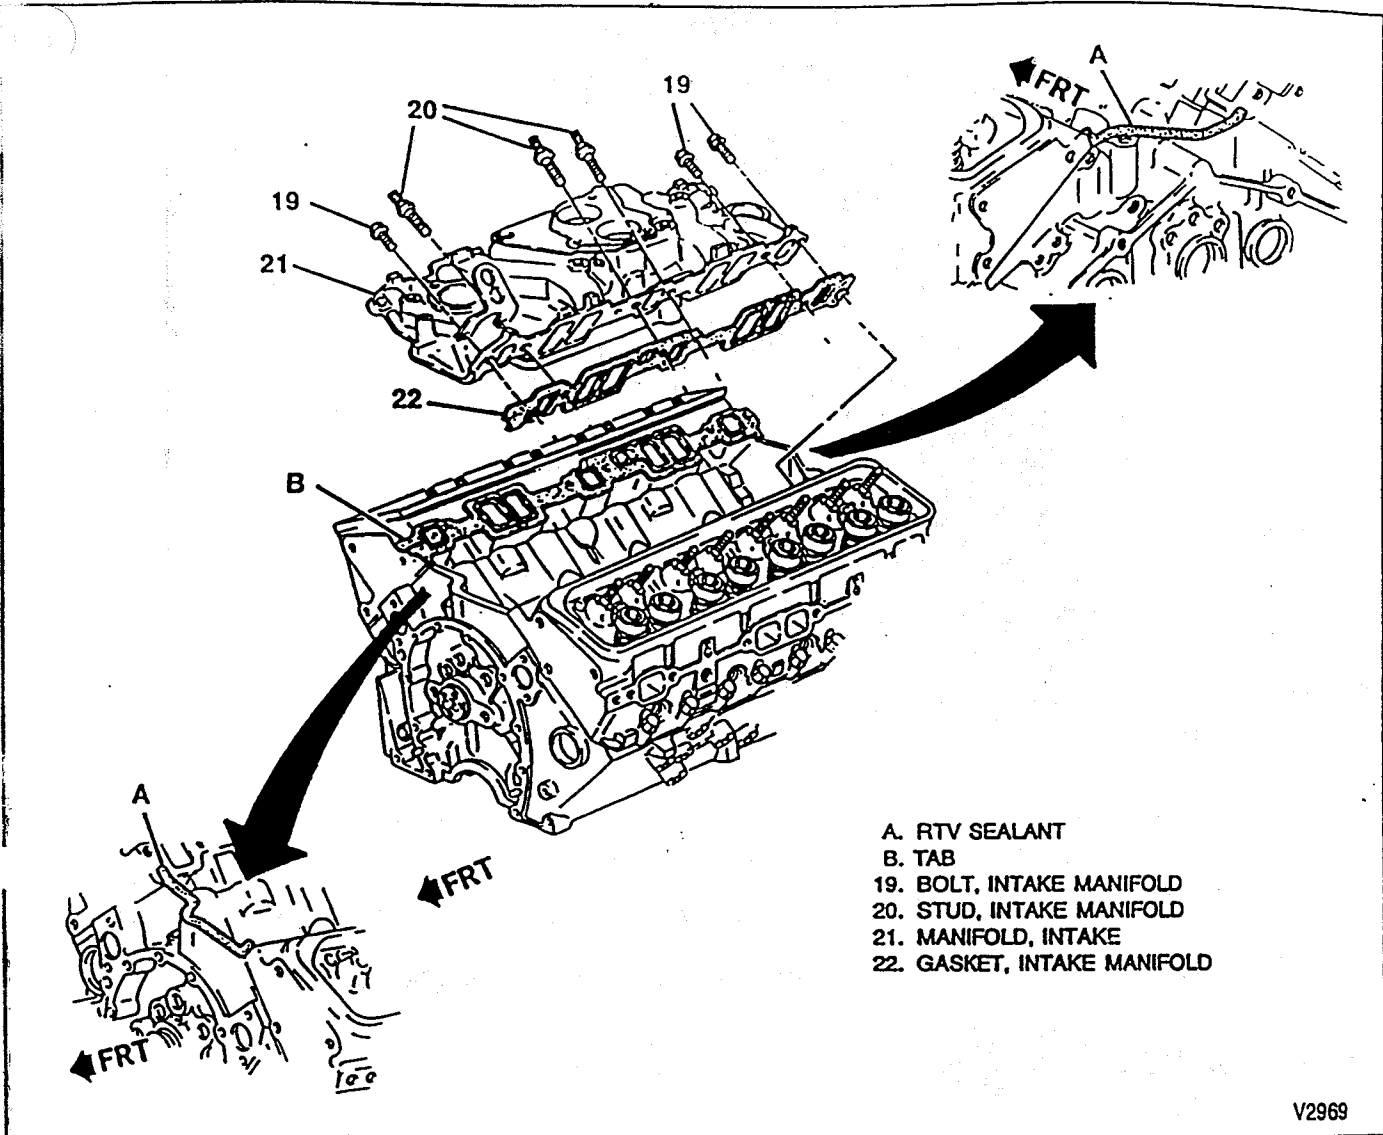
Intake Manifold (5.0L and 5.7L Engines)
